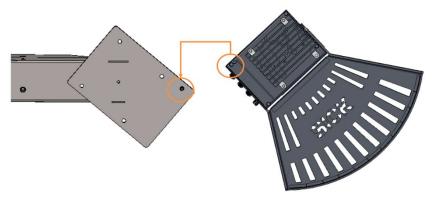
Fastening the LiDAR sensors to the mounting plates
